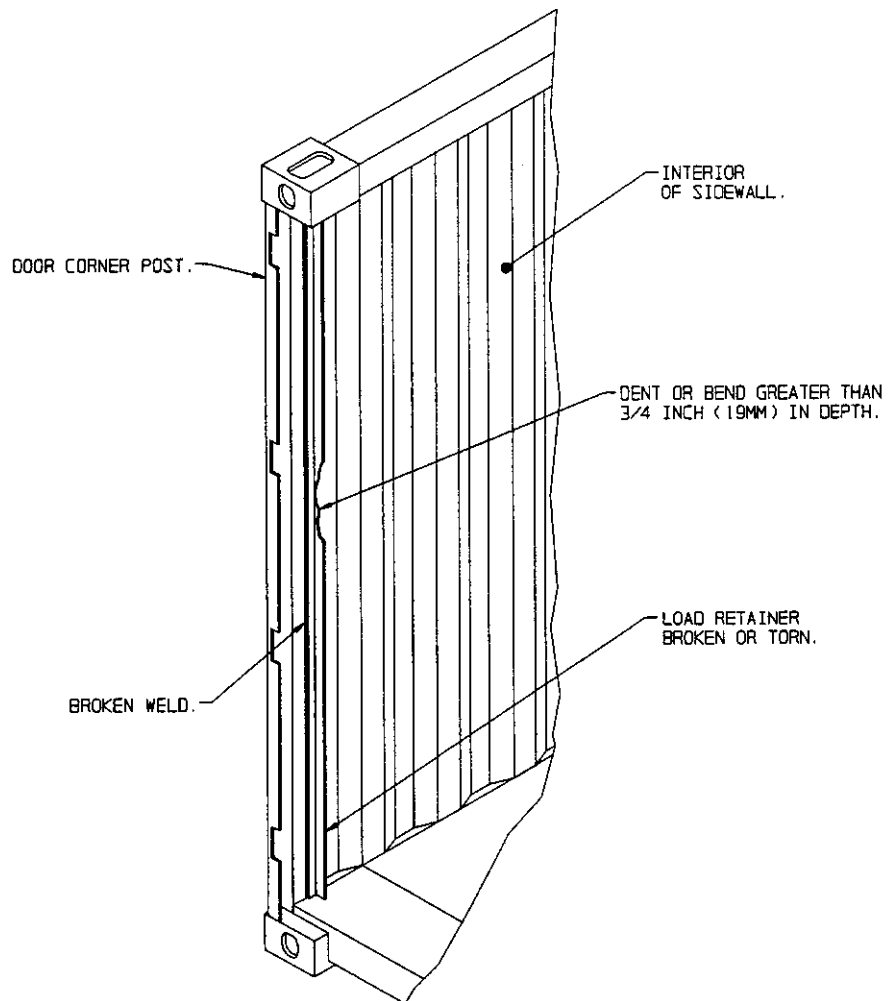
LOAD RETAINER DAMAGE
